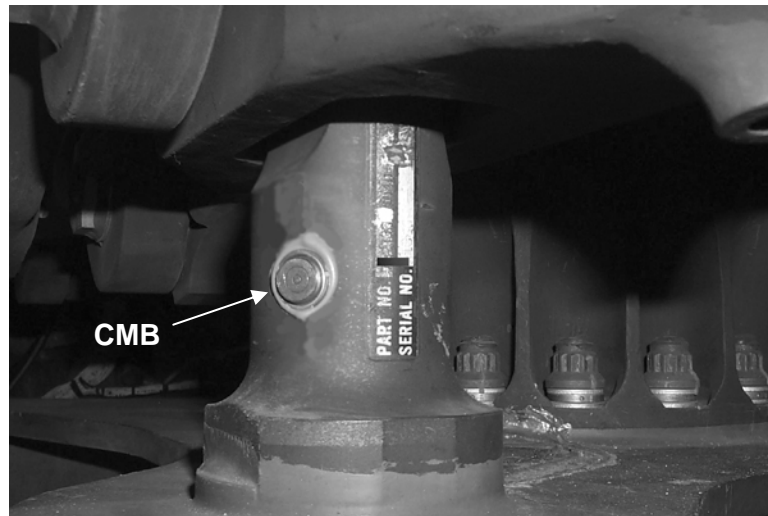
Mixer Support Assembly (AH-64A/D) with CMB Installed
